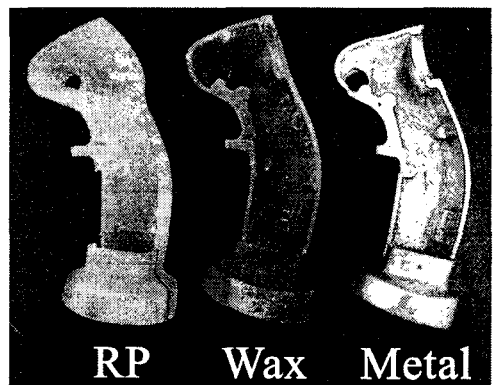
Photograph of RP part, wax part and metal cast prototype of part (I)
